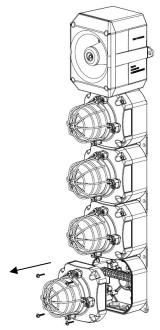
Accessing the Enclosure, PCBA & Terminals
